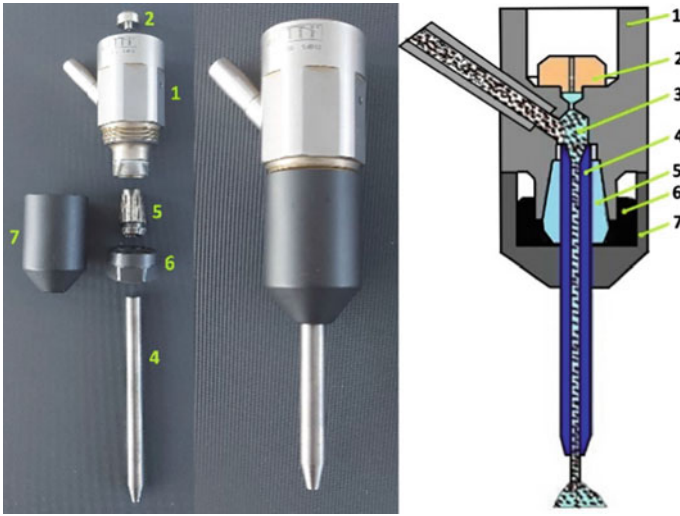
Abrasive waterjet cutting head: casing (1); nozzle (2), mixing chamber (3), focalization tube (4), collet (5), clamping nut (6), protective case (7)
